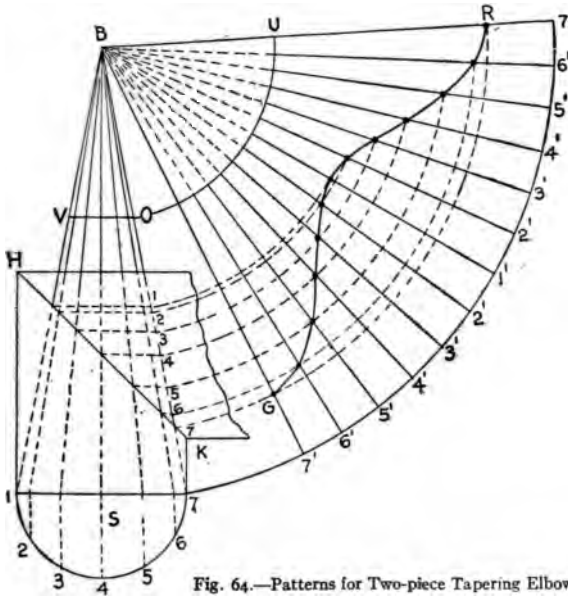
Patterns for Two-piece Tapering Elbow.
